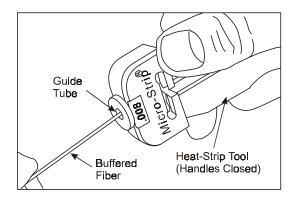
Heat-Strip Tool - Removing Fiber Coating from Buffered Fiber
